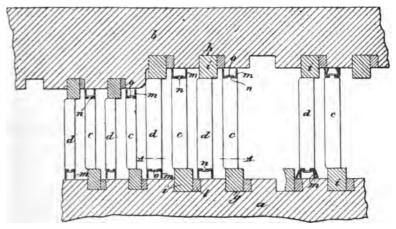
Longitudinal Section of part of Drum and Casing, with combined Fitting and Baffling Rings. (H. F. Fullagar, 21982 (1903).)
